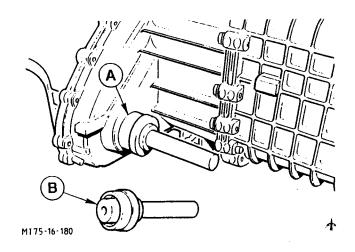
A - Radial oil seal B - Special Tool 14-028.
